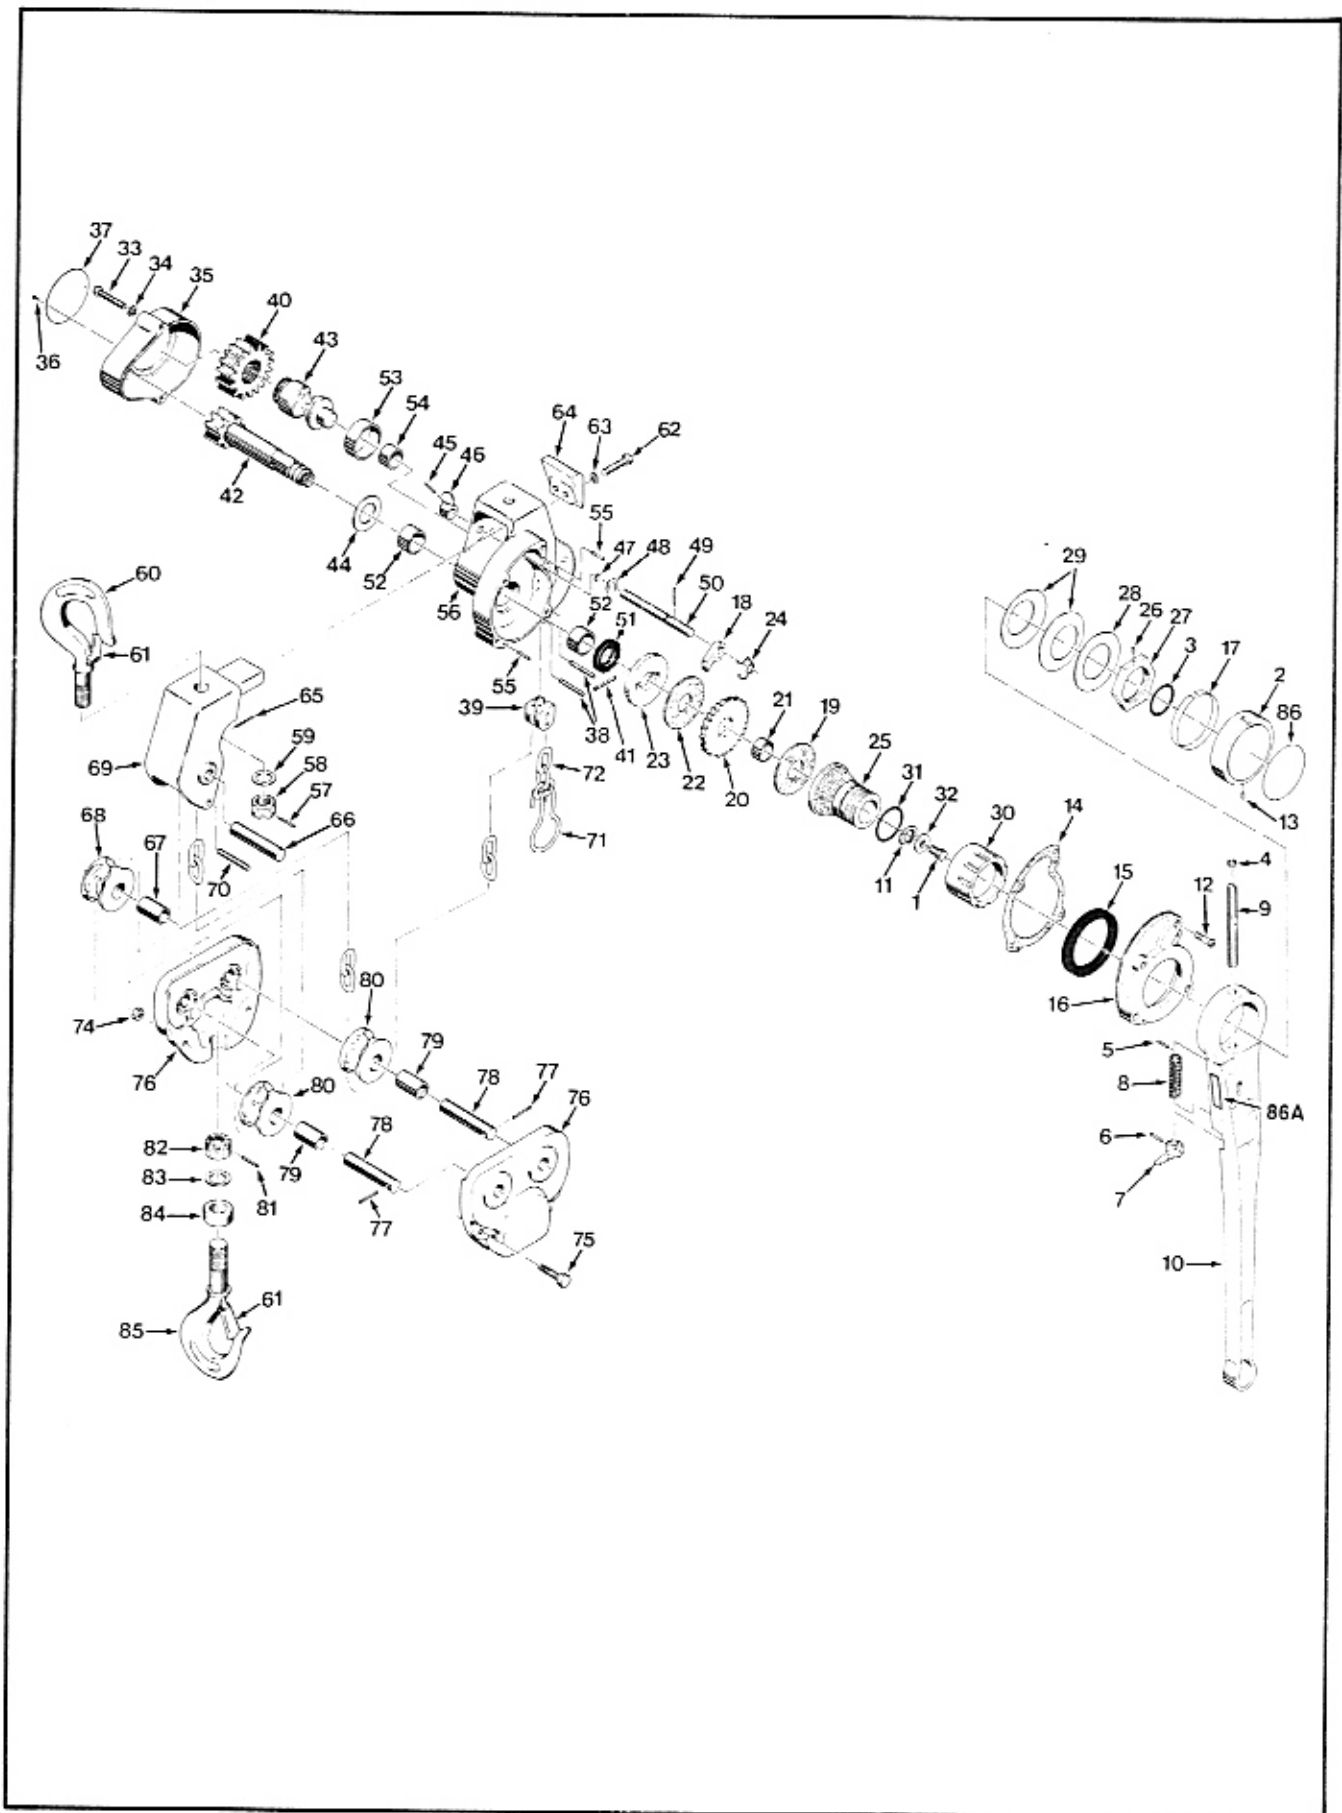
EXPLODED ILLUSTRATION OF MODEL MAL-30-4 HOIST
